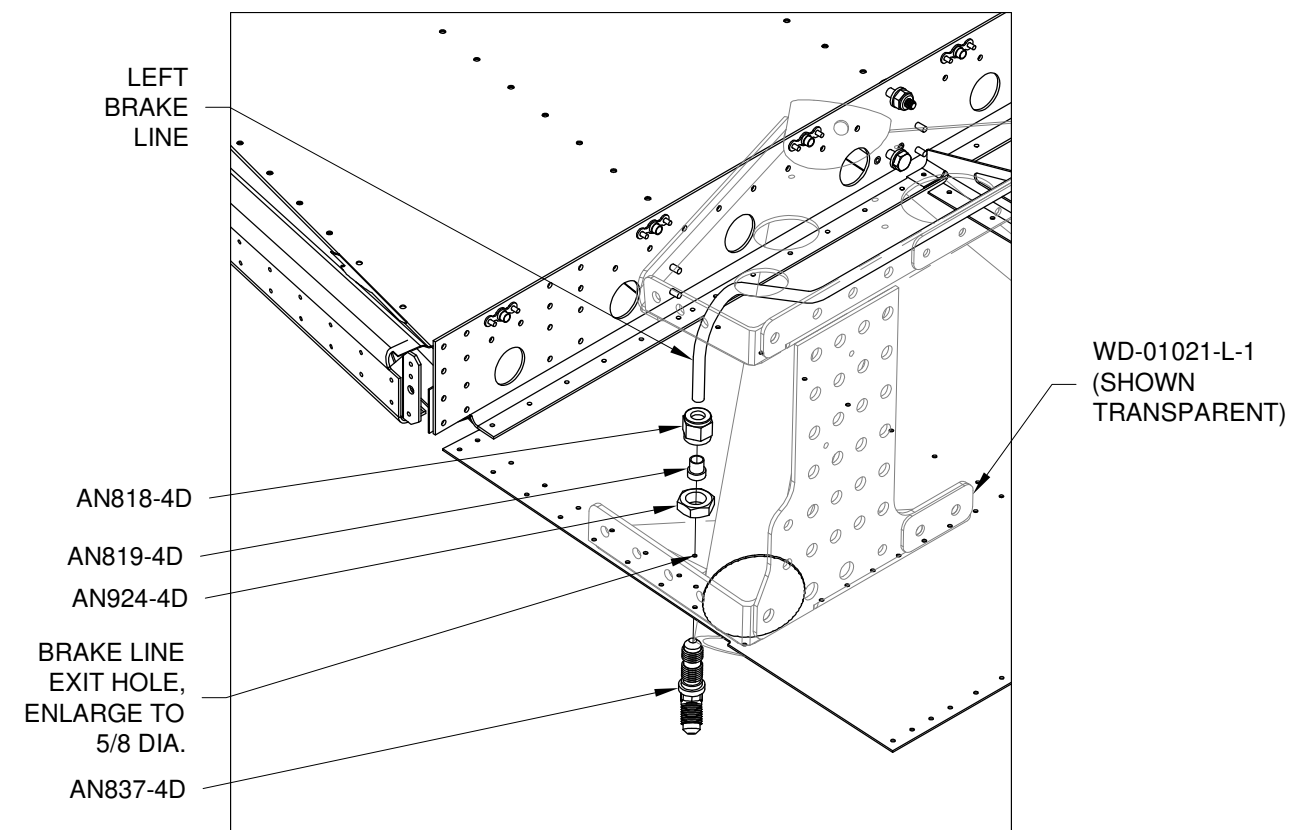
INSTALLING THE OUTBOARD BULKHEAD FITTING
